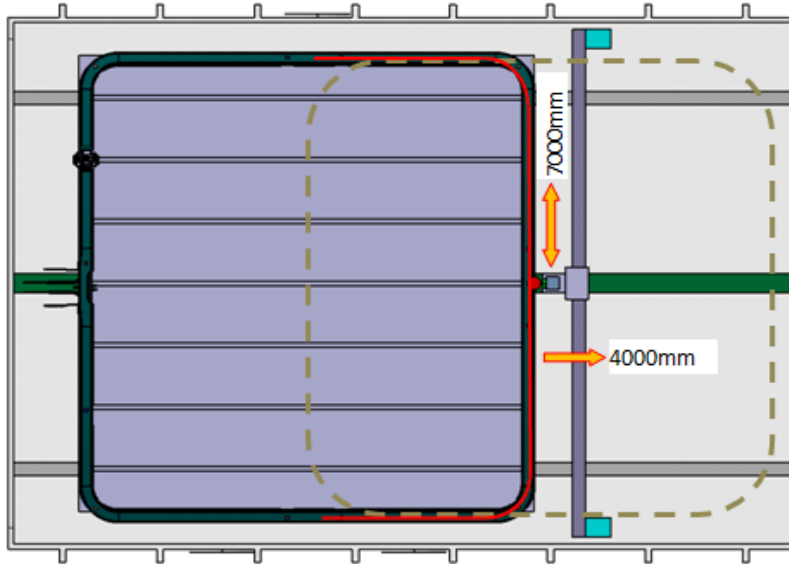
Overview of SCC case EBW closure welding
